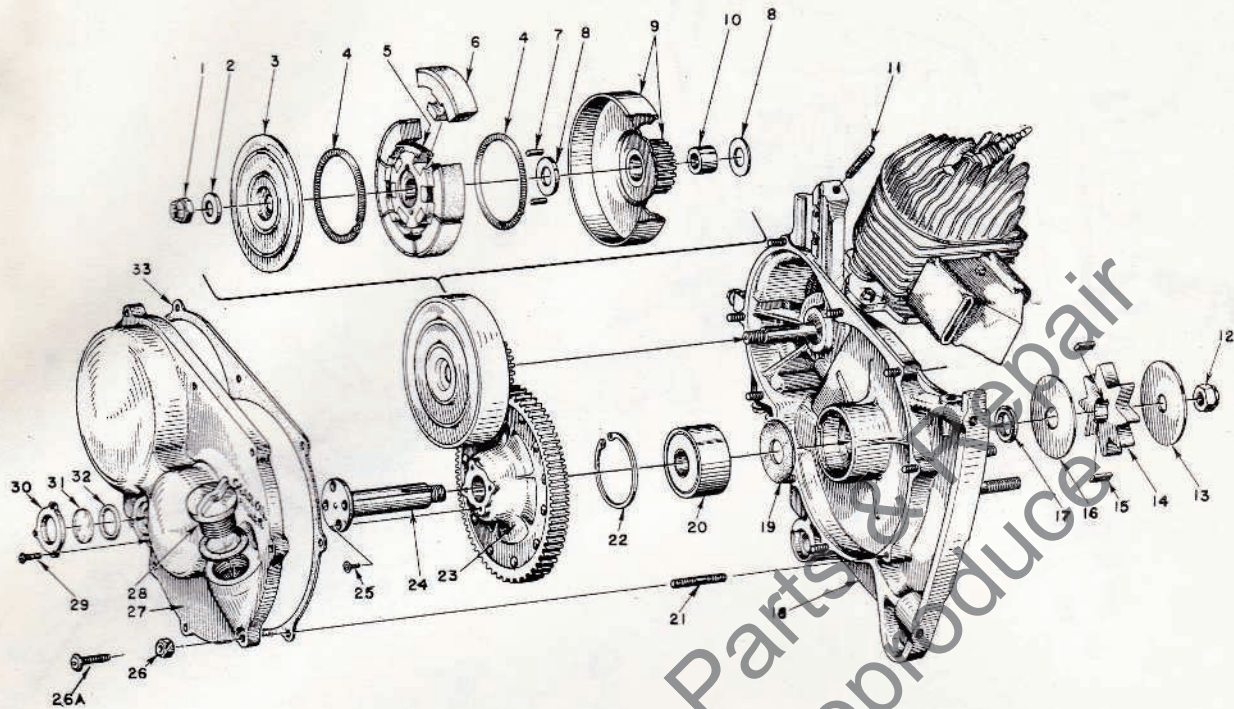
GEAR CASE AND SPROCKET PARTS
